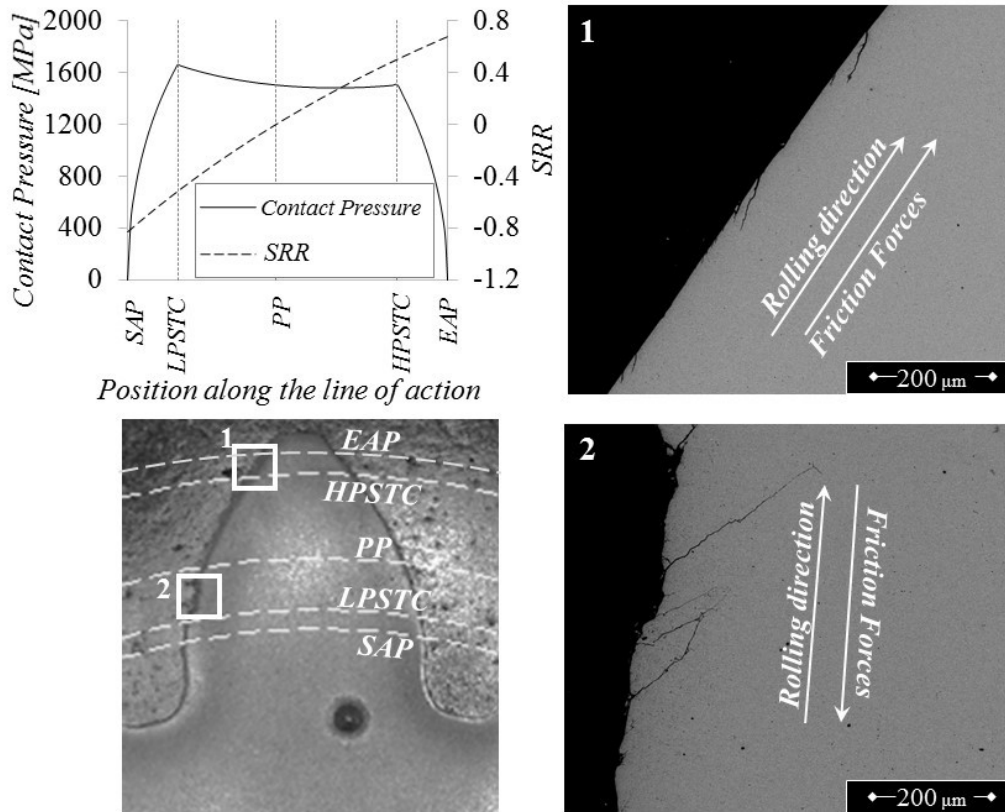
Contact pressure, Slide-to-Roll Ratio and crack morphology in a pinion gear tooth.
